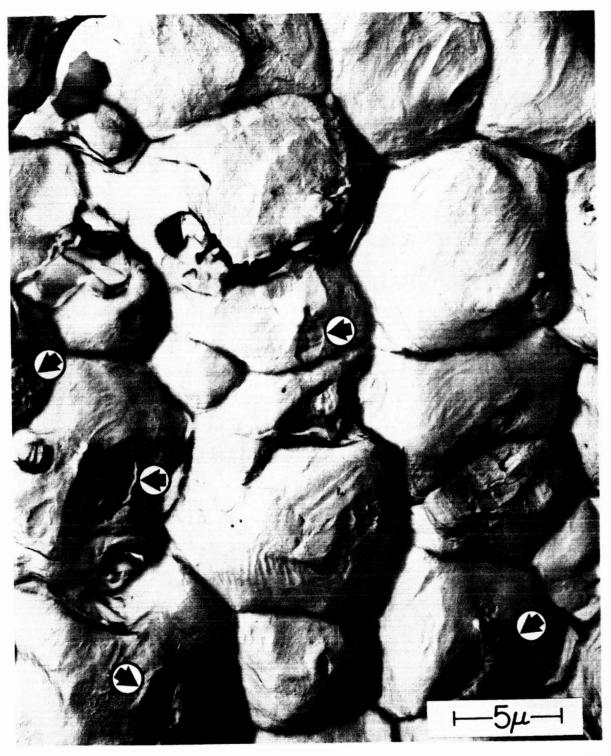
FRACTURE SURFACE OF 2219-T87 BASE METAL TENSILE SPECIMEN. (Fractograph taken in central "fibrous" region. Note the range of size of dimples. Arrows indicate origin of larger dimples at second-phase platelets.)
